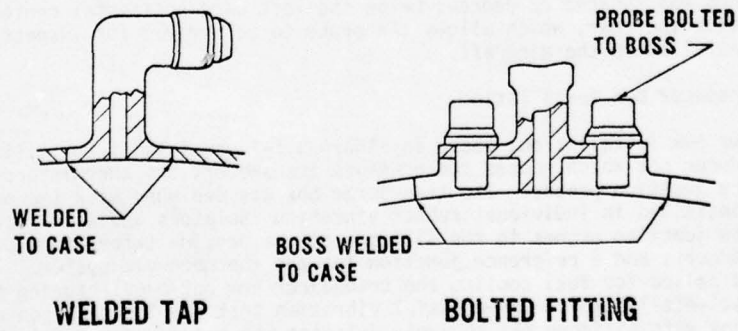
High Compressor Exit P_{S3} Wall Static Configuration
